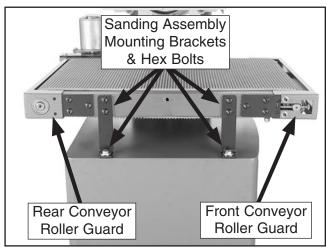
Conveyor roller guards and sanding assembly mounting brackets.
